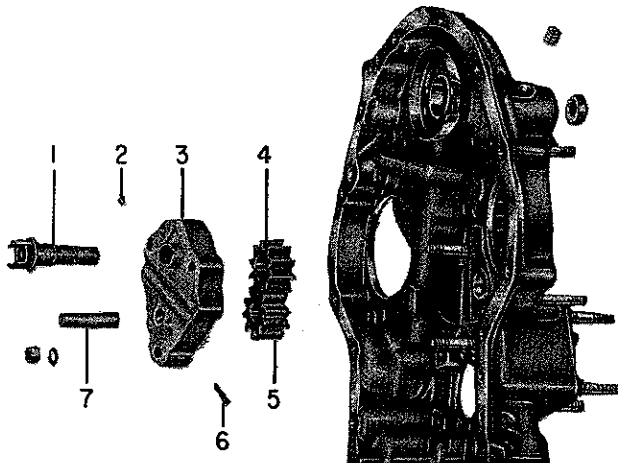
Vacuum Pump and Hydraulic Pump Dual Drive Assembly
